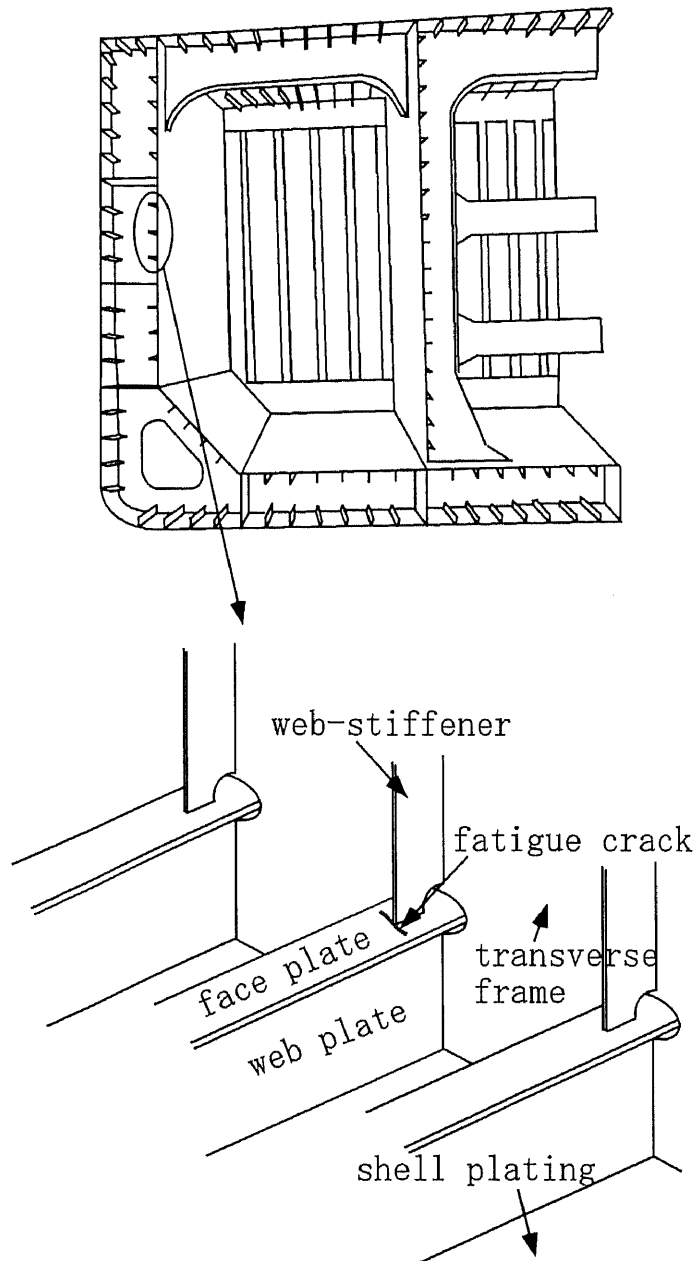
Fatigue crack at the intersection of structural member of an oil tanker.
